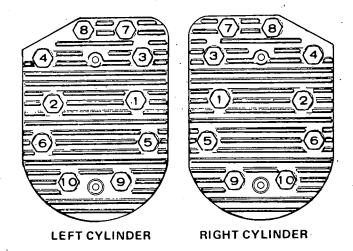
HEAD BOLT TIGHTENING SEQUENCE
